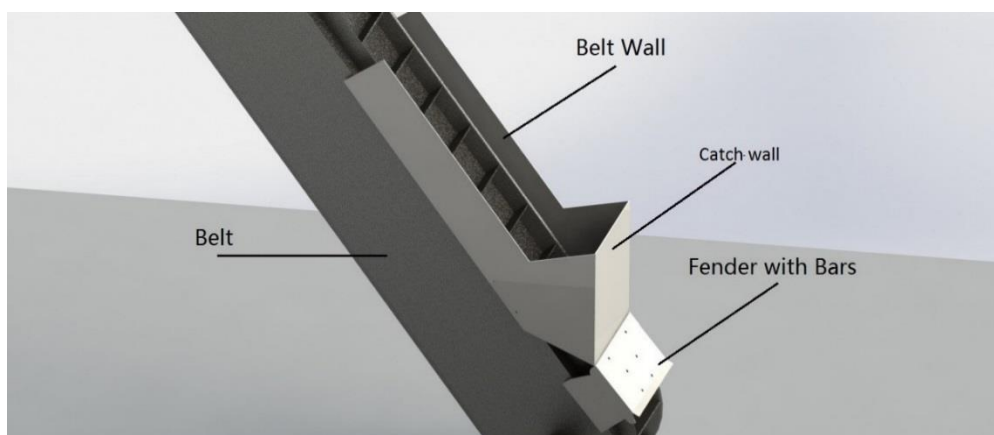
Detailed design of “Catch Wall with Fender Bars”
